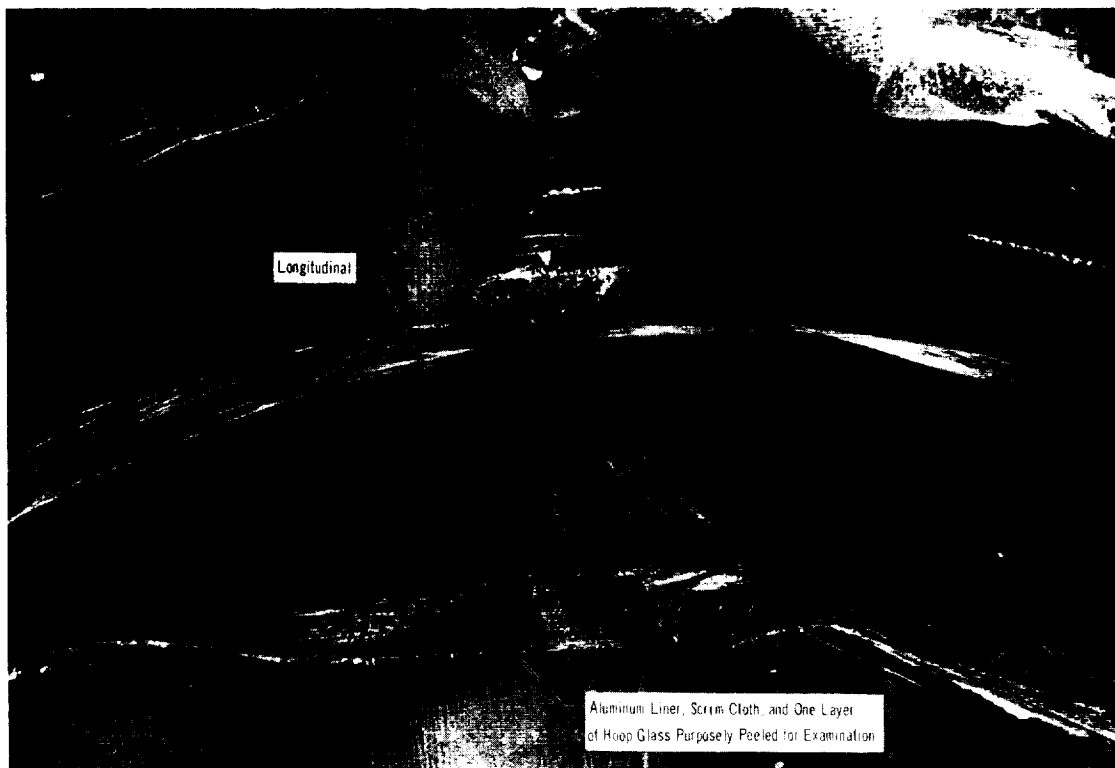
Vessel TA-2 – Post-Test Closeup View of Failure End
